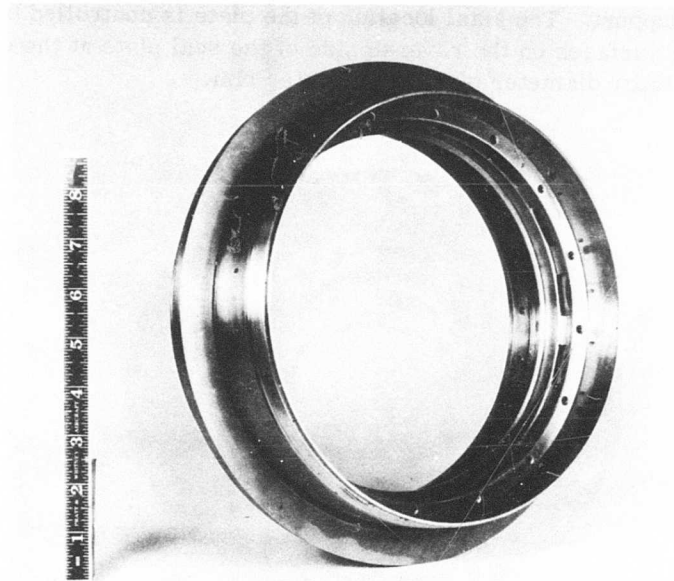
Regenerator Bearing Housing and Integral Seal Plate.
